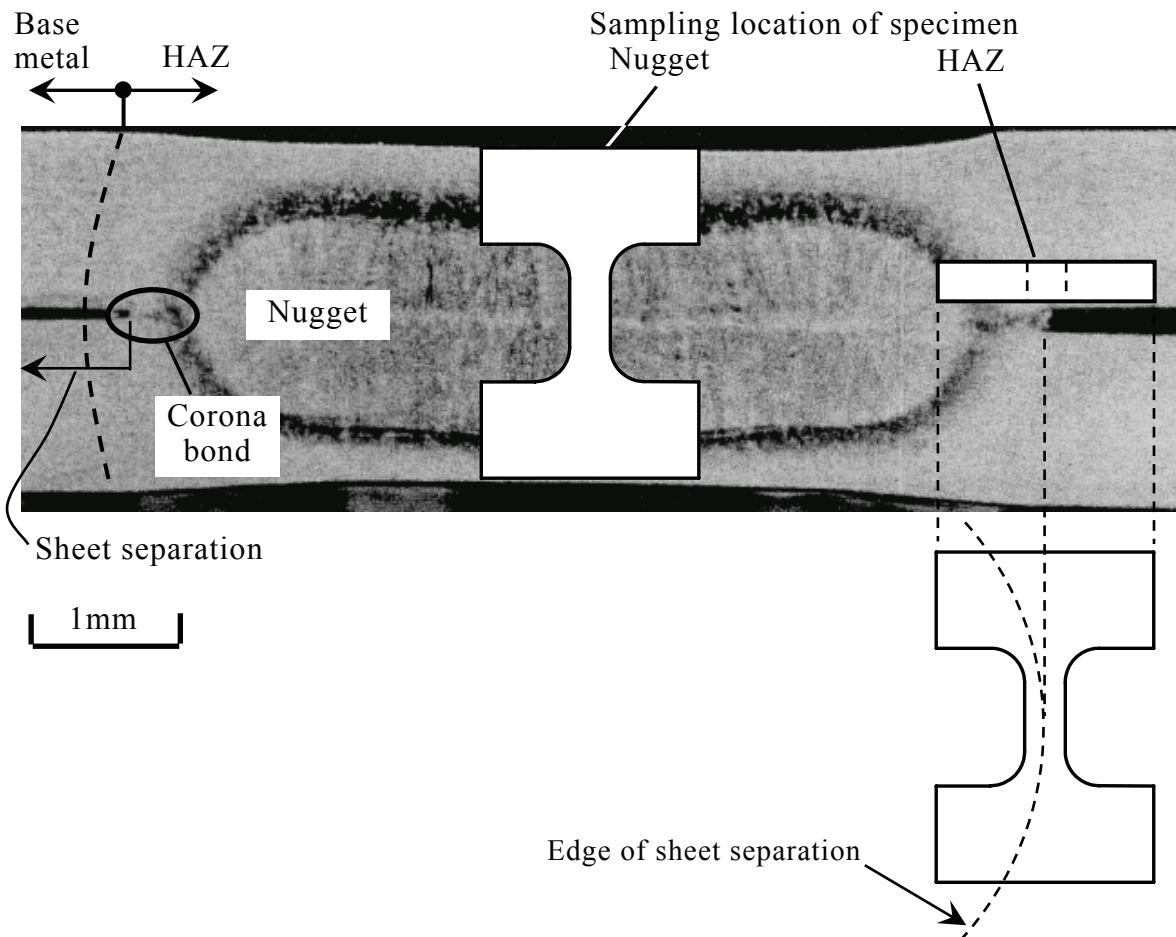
Cross section of spot weld and sampling location of small specimens.
